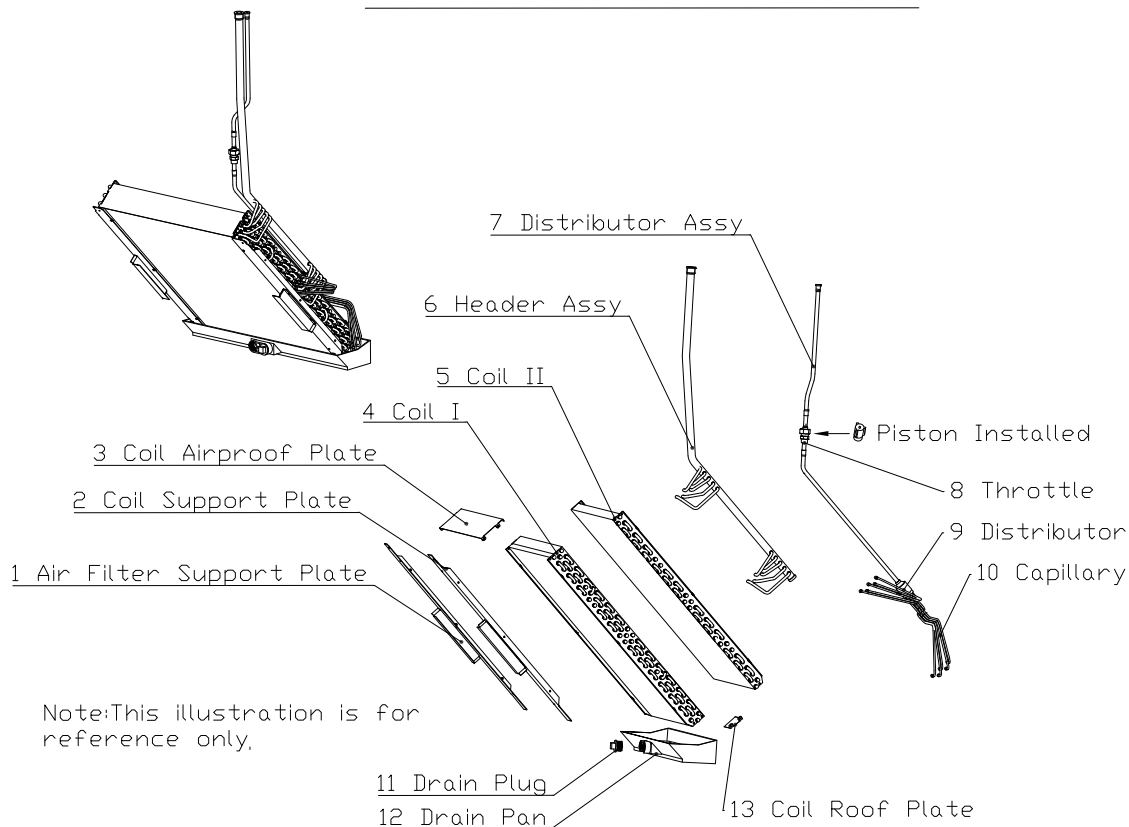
FFMA, FMA4, FMA5 (Sizes 30 & 36) Expanded View - Evaporator Parts & Drain Pan
